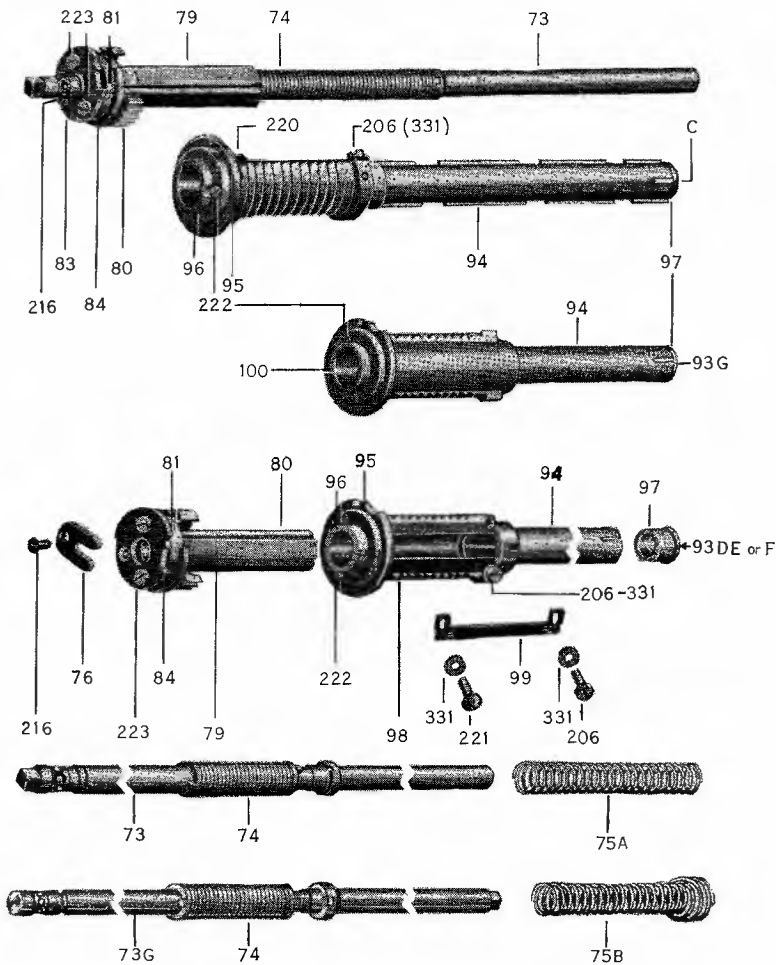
VERTICAL AND ROTARY RATCHET AND SHAFT ASSEMBLIES.
